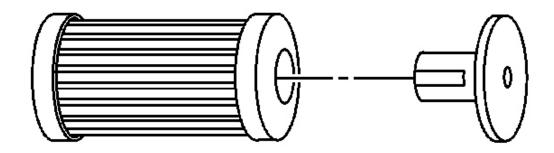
View Of A/C Filter & Check Valve Courtesy of GENERAL MOTORS CORP.
